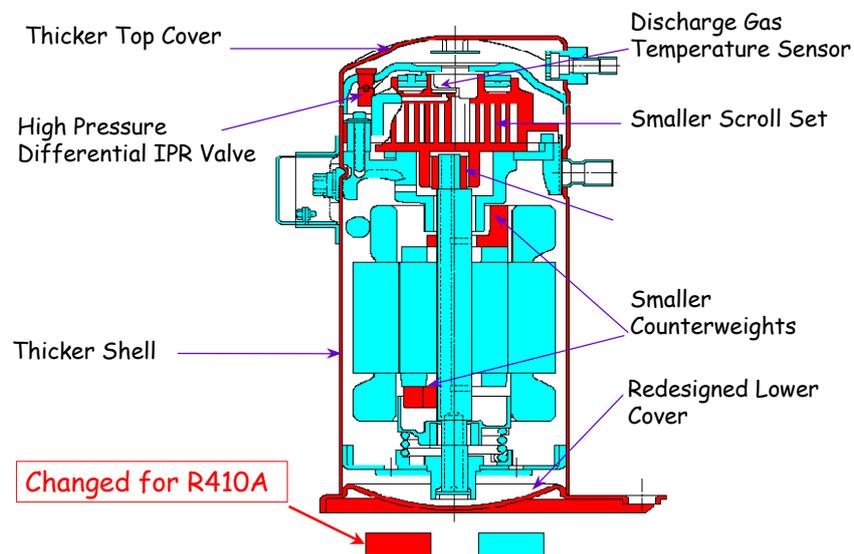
ZP Scroll Compressor Showing Changes Made for R410A
